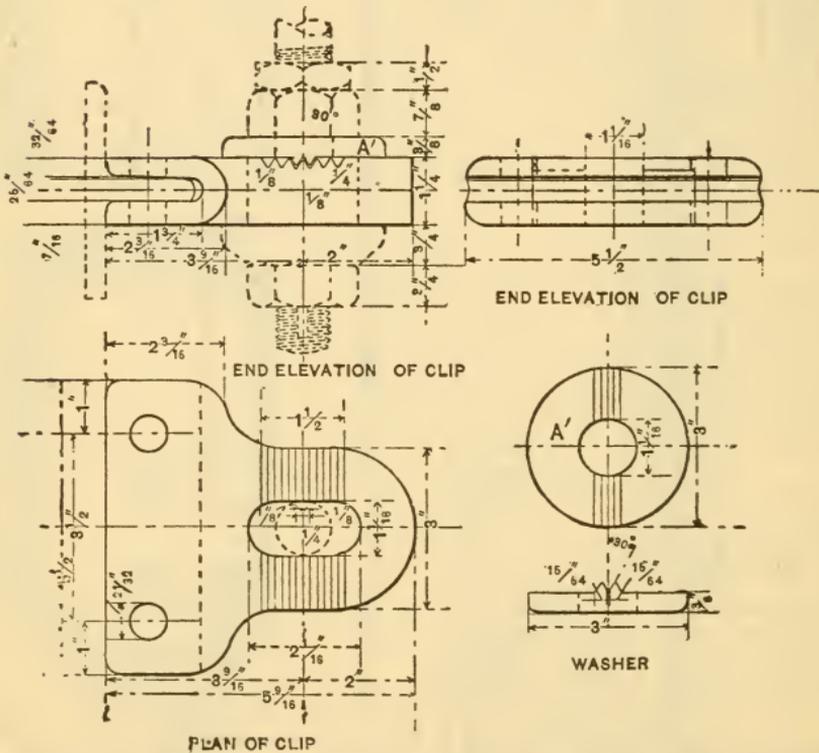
Clip and Ear for Conduit, Metropolitan Railroad, Washington, 1895.
